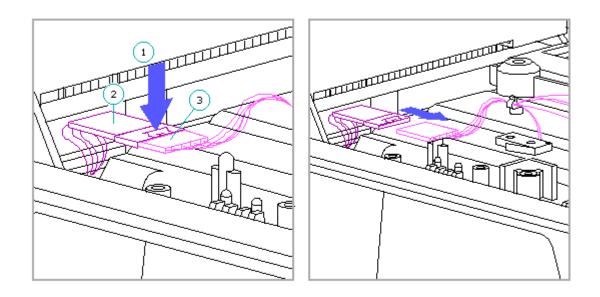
Disconnecting the Harness Extension Cable from the Eject Switch Cable Harness
